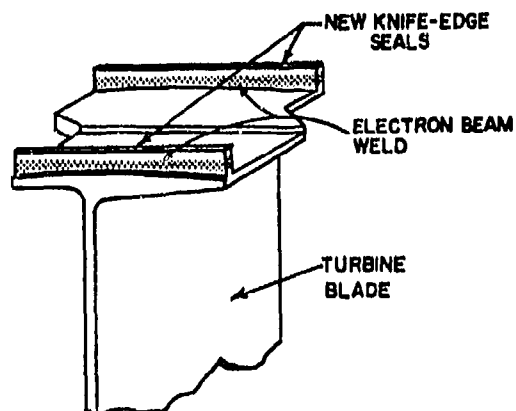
This sketch depicts replacement of turbine blade shroud knife-edge seals by Electron Beam welding.
